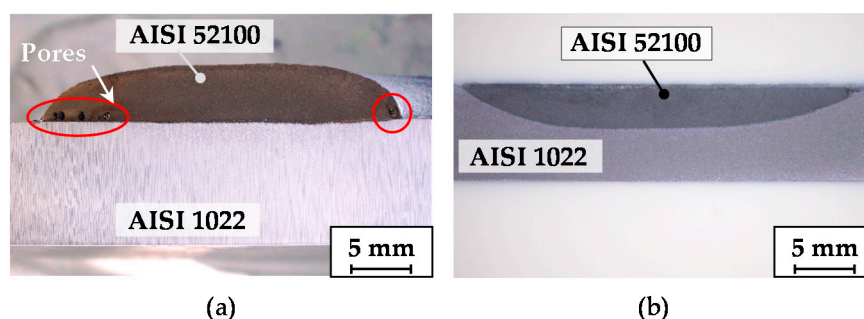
(a) Section view of the cladmed workpiece welded with a single seam and (b) of a near-net-shaped bearing washers after forging (etched with nitric acid solution).
